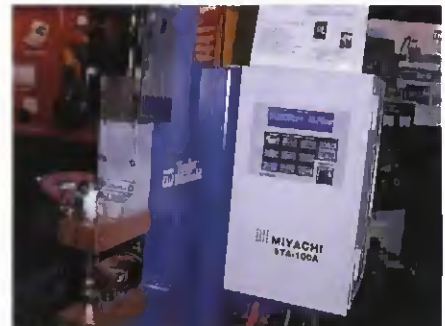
The INV-PED pedestal resistance welding machine was getting a lot of attention at the Show.
